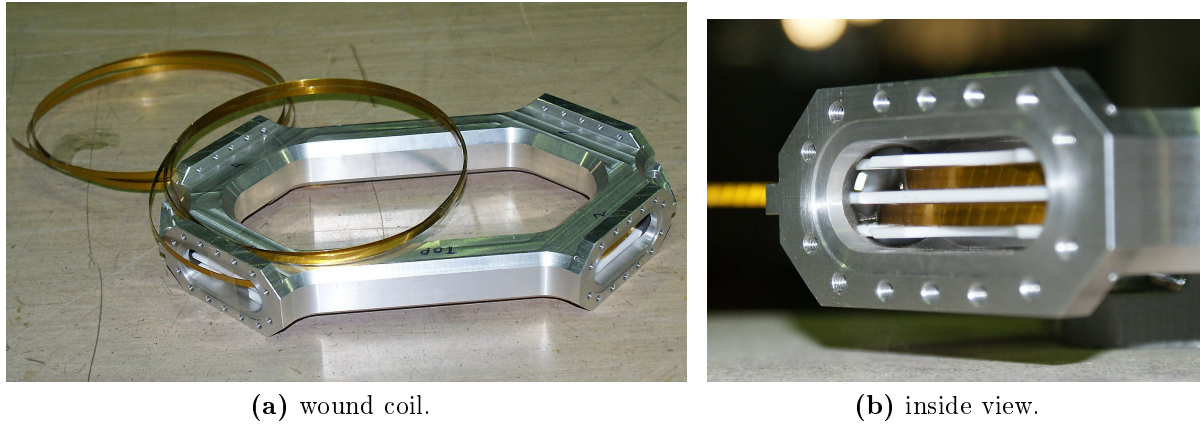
Wound HTS test coil (left), inside view through a corner flange prior to insertion of the flow blocking plug (right).
